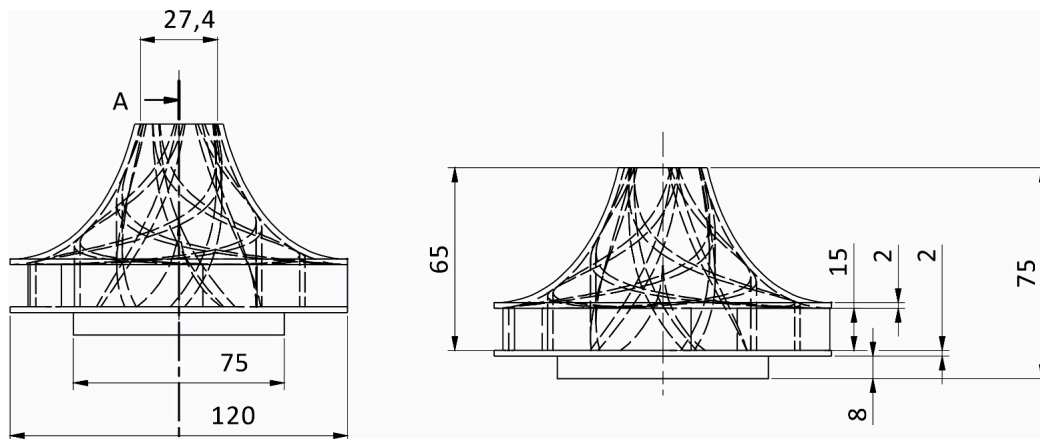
Technical drawing of impeller investigated in this study [26]. The numbers represent the different measures in mm.
